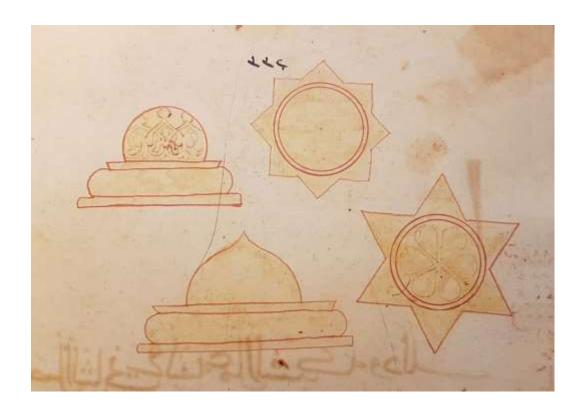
A detail drawing shows the top, side, and front views of the door knob (Topkapi MS 3742, p. 332)
